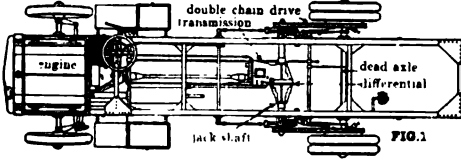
Top or plan view of a truck chassis using a double chain drive. Note the rear axle is a "dead" type of axle and the differential is mounted on the jack-shaft—see pages 18 and 20. The engine is a four cylinder engine. In fact, most truck engines are four cylinder—see page 747.
